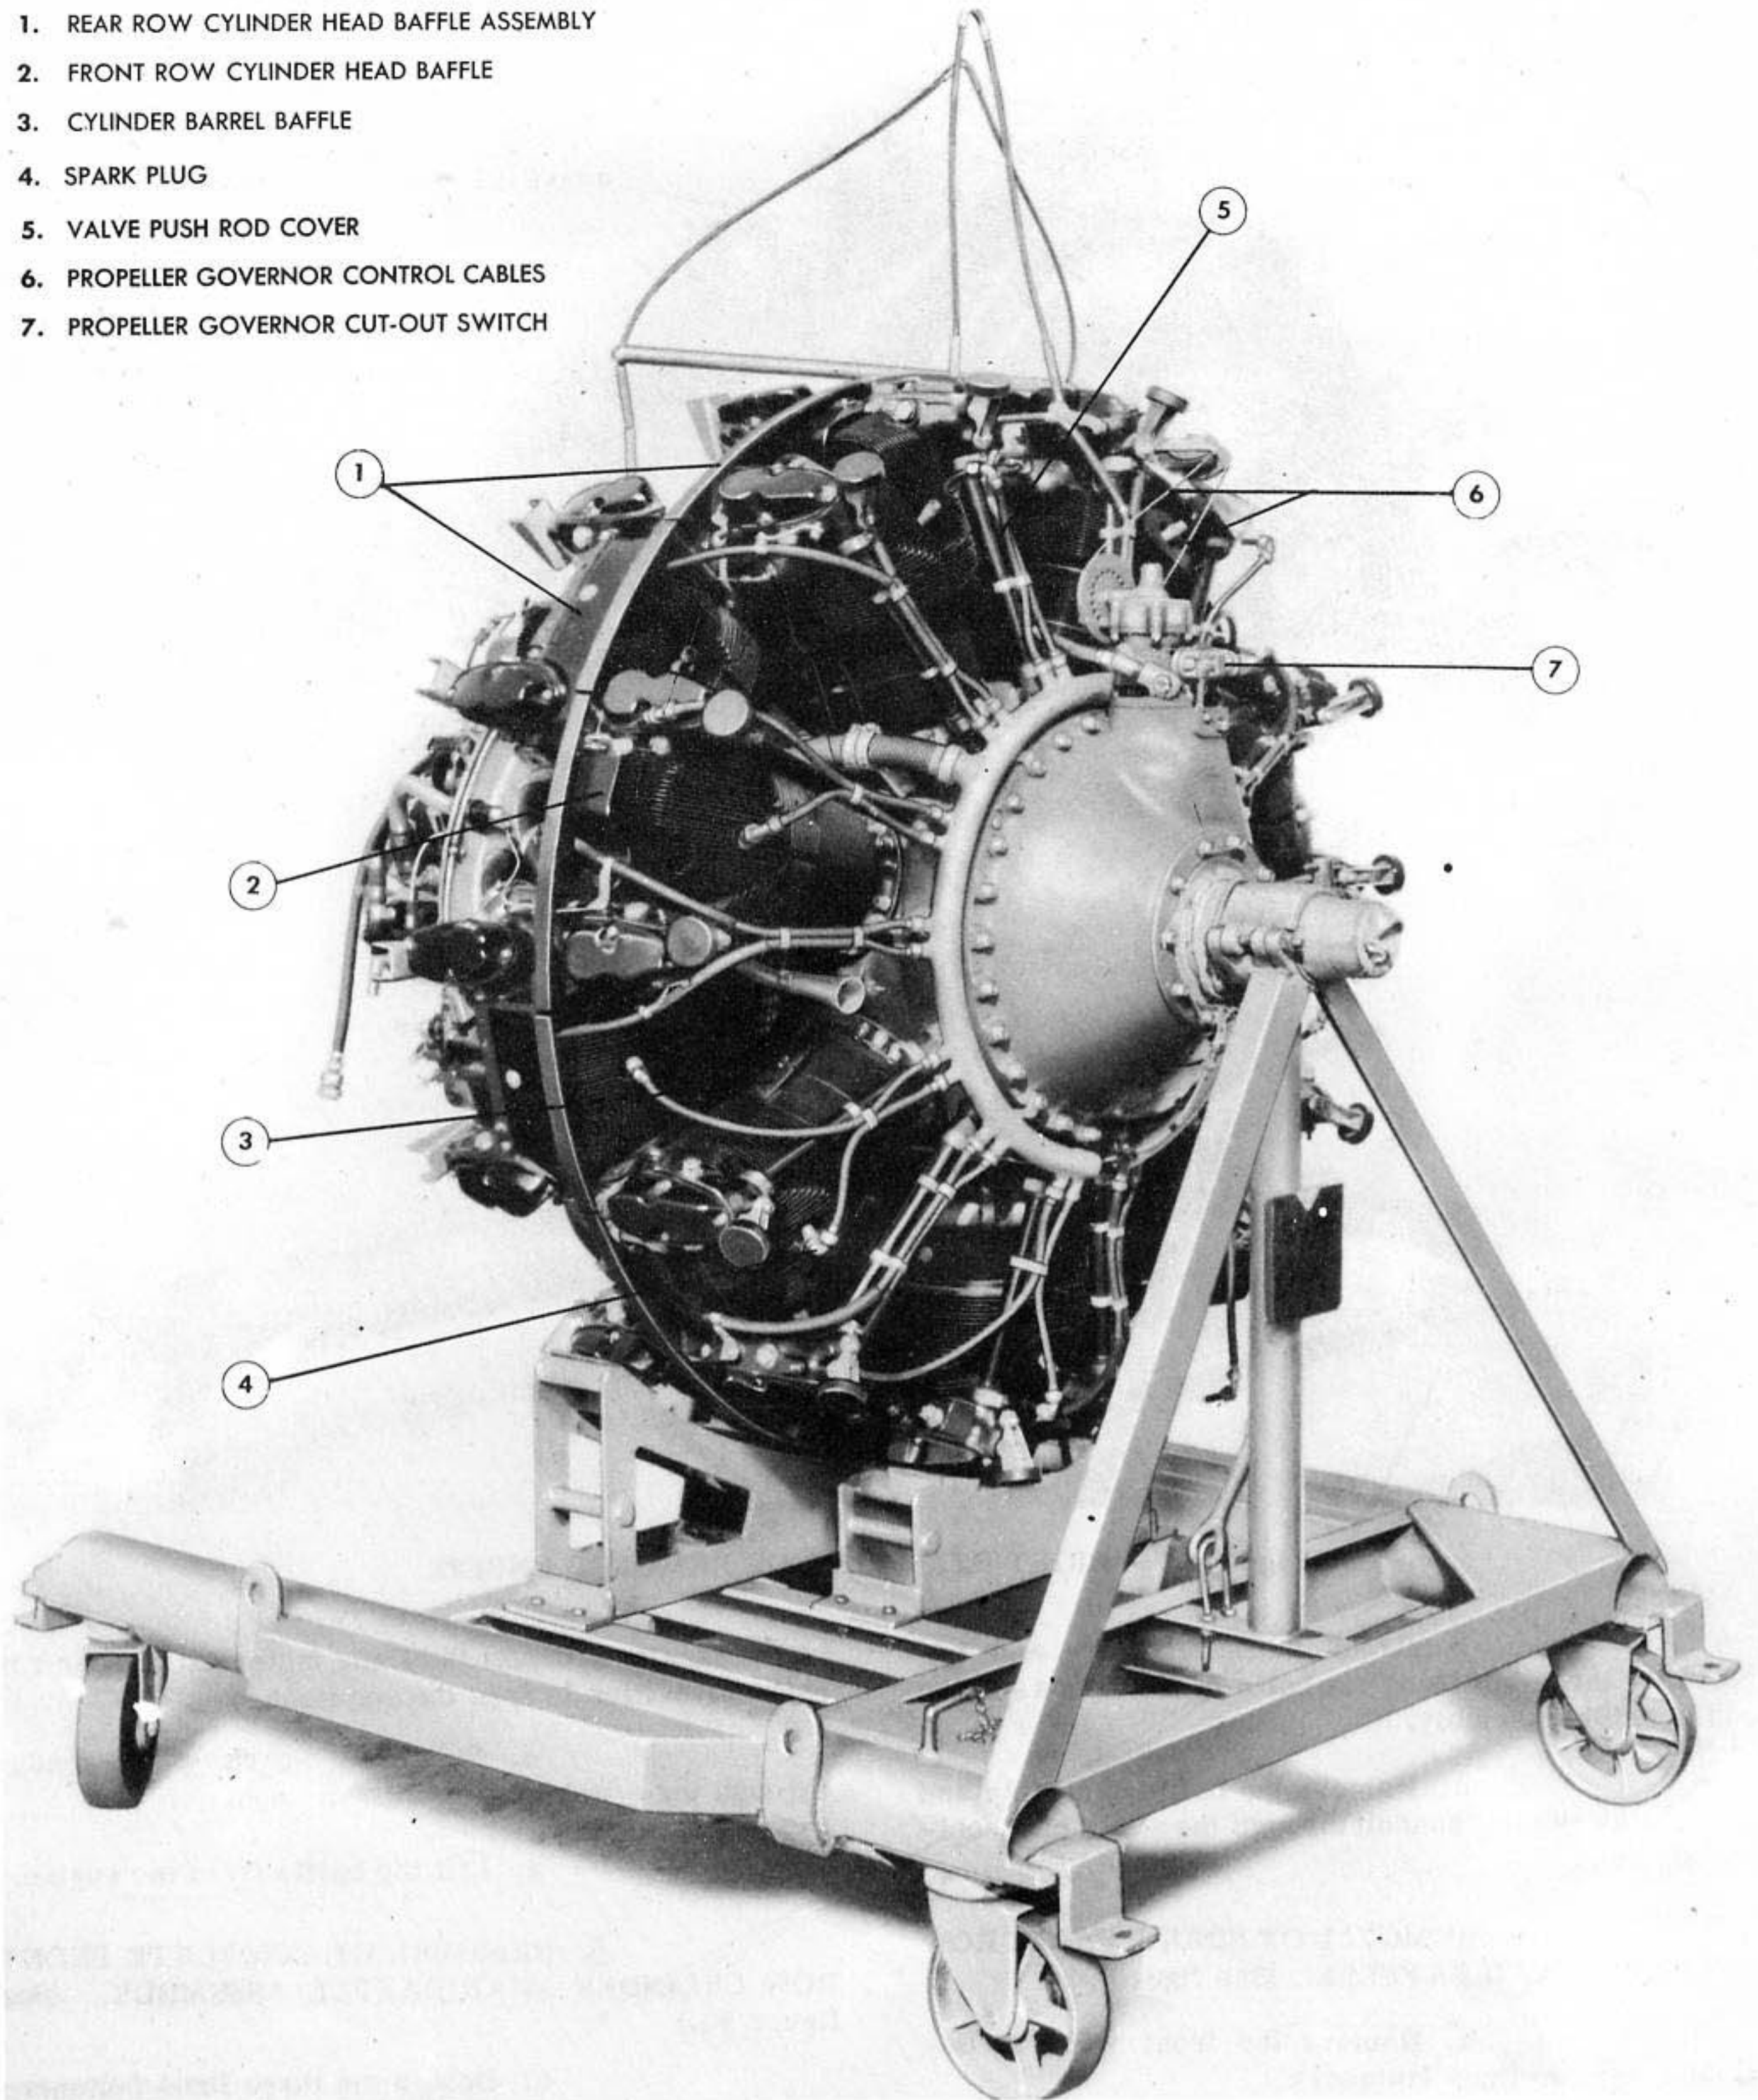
LEFT FRONT VIEW OF REMOVED ENGINE
